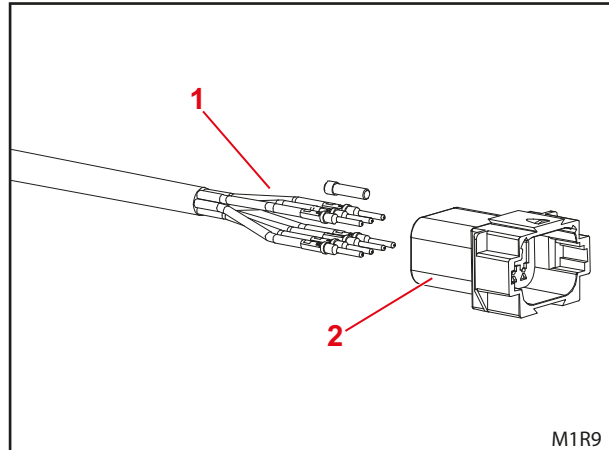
8-pin plug connector without "lug" for installation in a Hydro-Fix lower part
